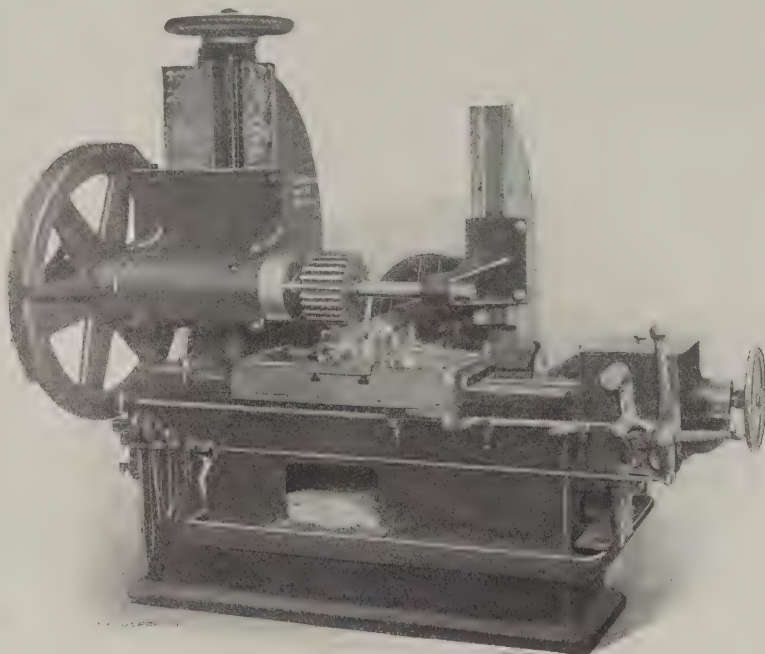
Automatic Pinion Cutting Machine. Front View.
